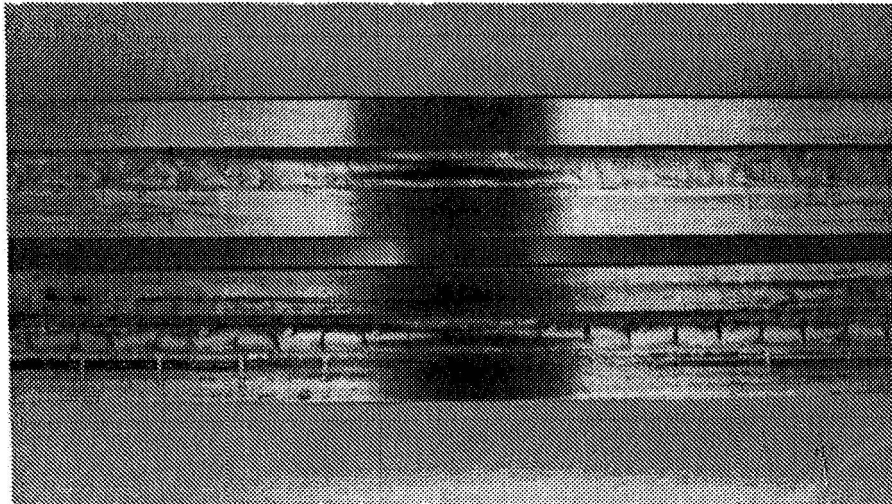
Debris Ridges Observed at Ball Spacing Intervals on Post Test Disassembled Bearings
